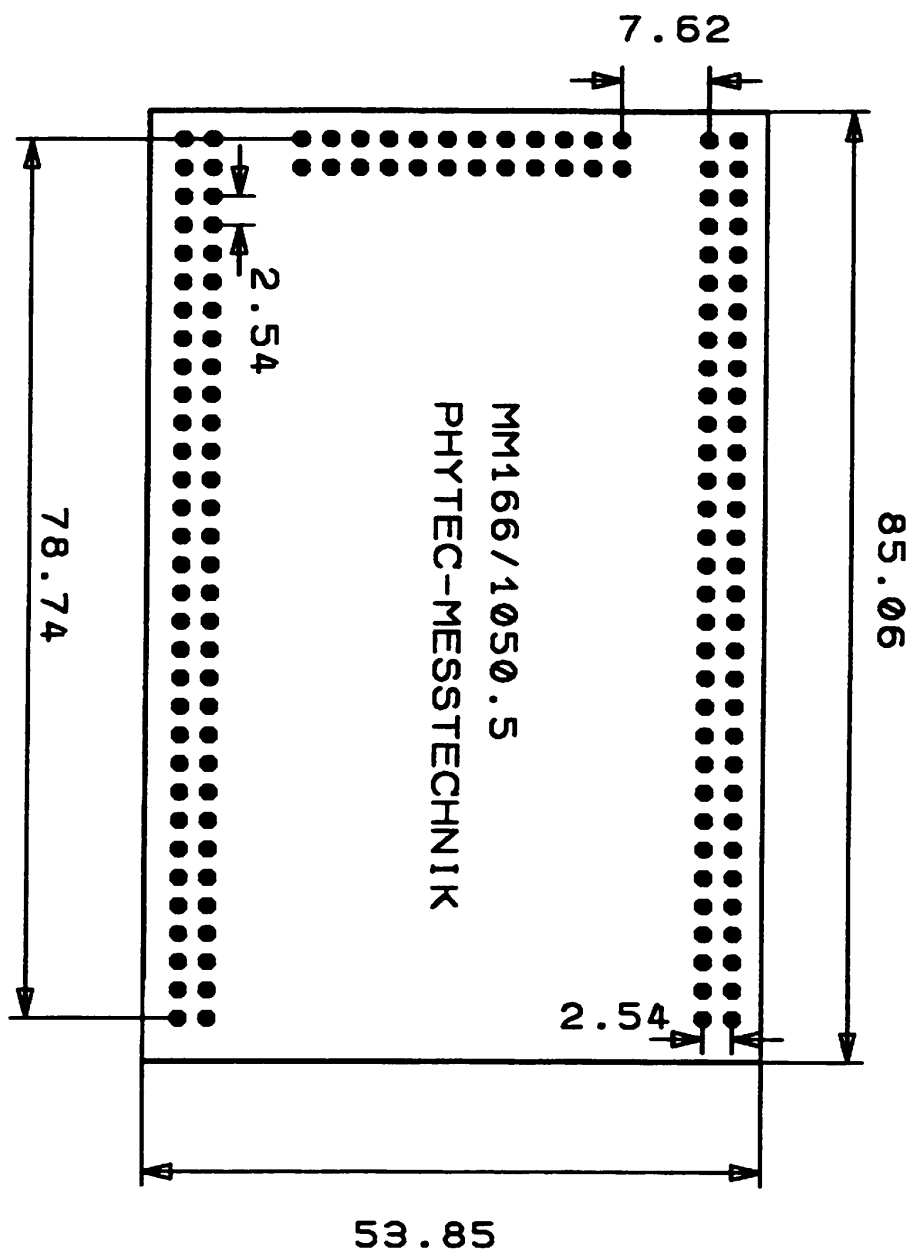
Mechanical Dimensions and Location of the Pin Header Rows
